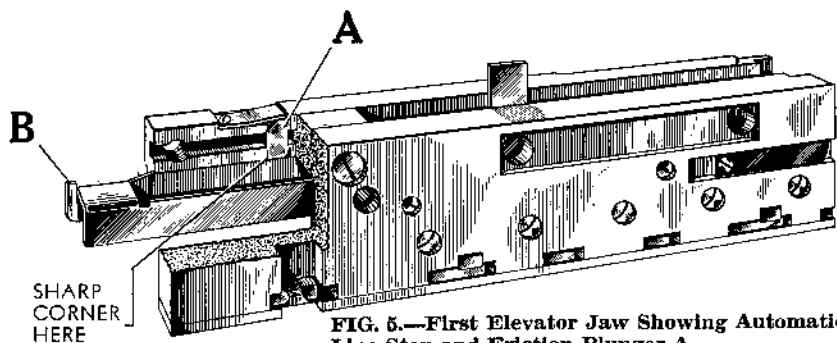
First Elevator Jaw Showing Automatic Line Stop and Friction Plunger A.
